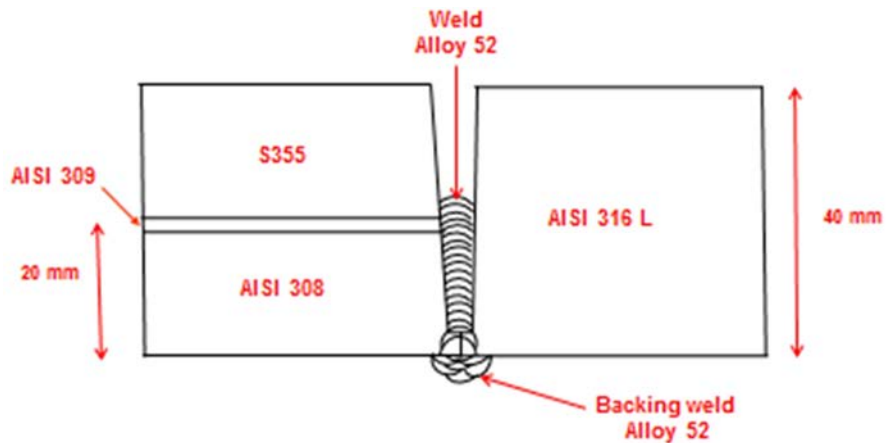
Completed Alloy 52 NG weld mock-up.
